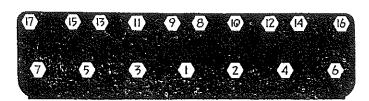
Head tightening chart for 239, 257, 286, 331, 400 and 450 engines
